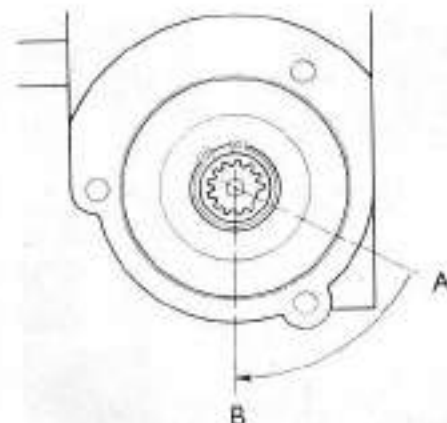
View showing timing of 3-cylinder diesel injection pump drive gear to camshaft; refer to paragraph 90.
